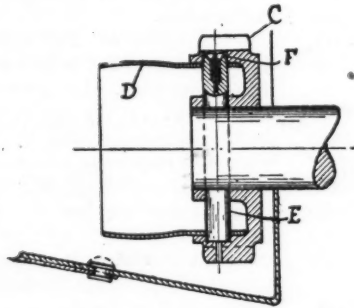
Method of mounting driving gear and fan pulley on crankshaft
